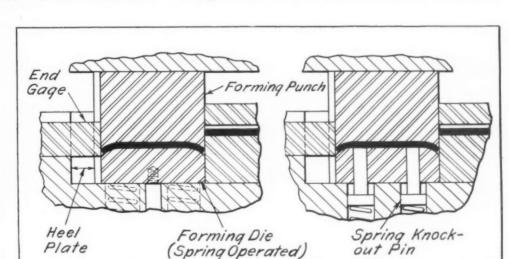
(Left) Die with Spring Pad for Raising Part to Top of Cutting-off Die. (Right) Die with Spring Knock-out Pins
